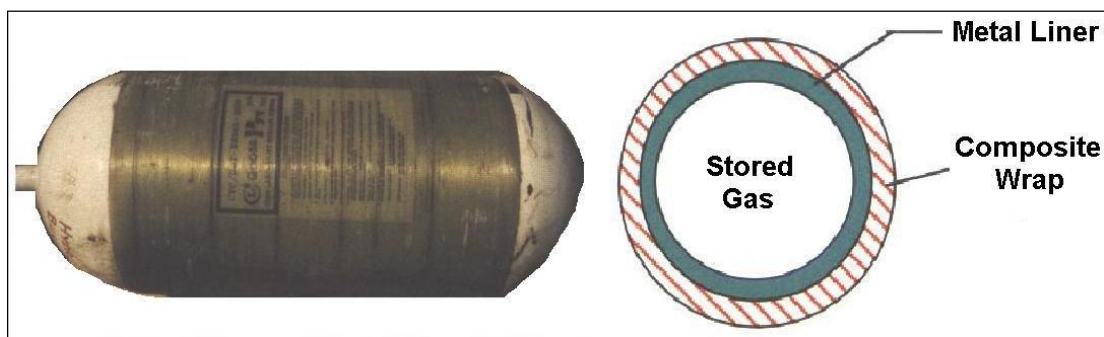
Typical Type 2 Hoop-Wrapped Container
